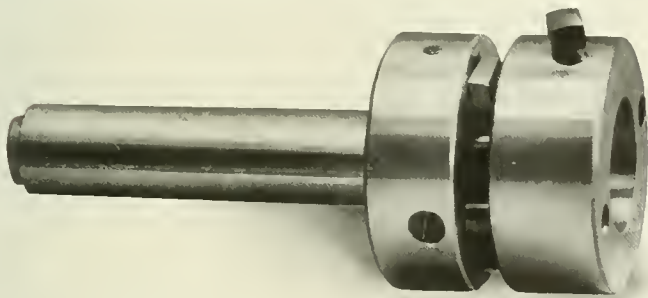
Cleveland "Silent" Die-holder for Right- or Left-hand Threads
